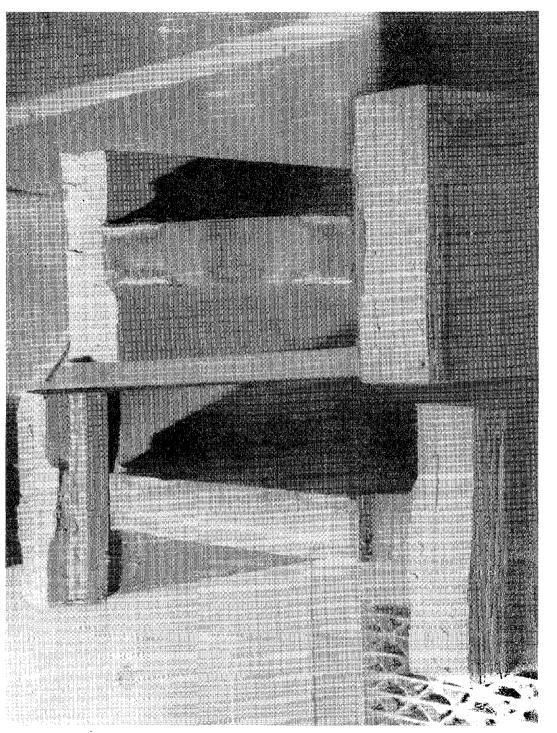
FAILURE OF FULL PENETRATION WELD SPECIMEN NO. 4.
